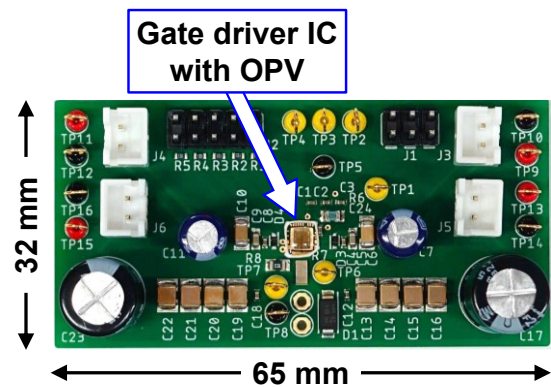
Photo of gate driver PCB including gate driver IC with OPV [3].
